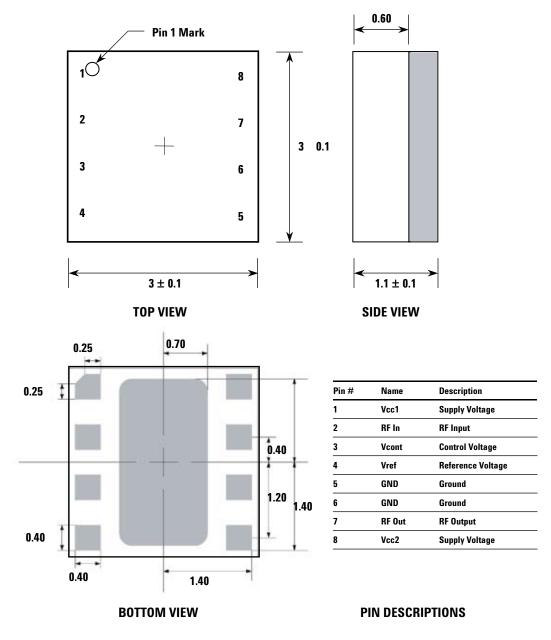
Package Dimensional Drawing and Pin Descriptions.
